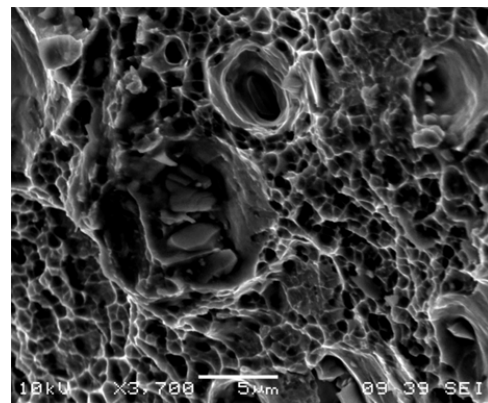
(a) Fracture surface in BM tensile tested specimen
